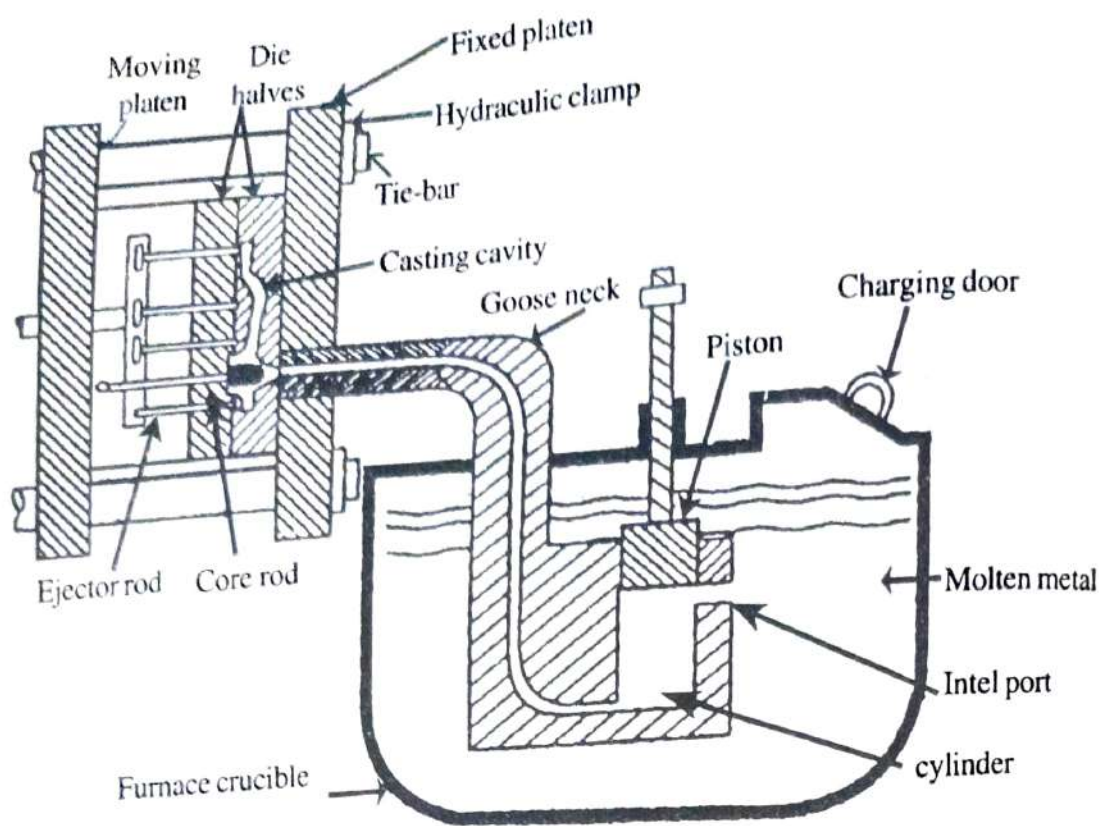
Goose neck Submerged plunger Type Hot Chamber Die Casting Machine.
